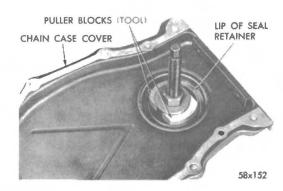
Puller Blocks expanded to Puller Position (Tool CA-3506)
